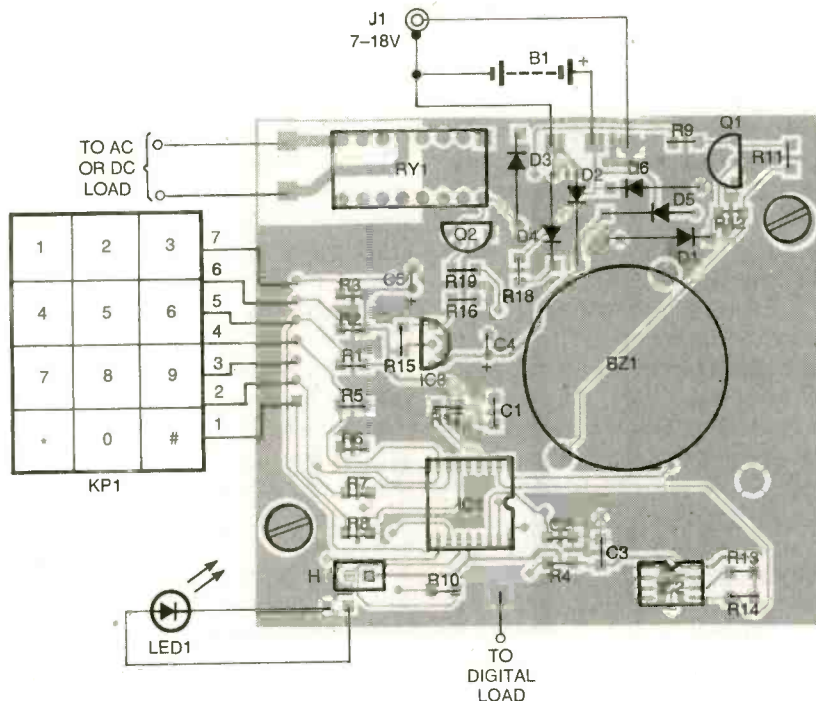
Assemble the Electronic Padlock, guided by this parts-placement diagram. When assembling this project, be extremely careful of component placement and orientation, as the circuit contains several surface-mount components and you don't want to have to remove any of those tiny components due to construction errors of any form.
